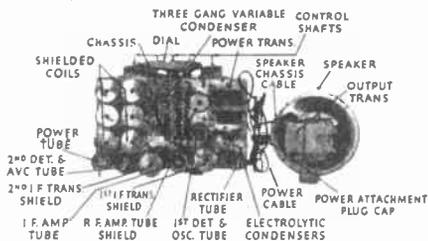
A. Most of this you can see without removing the chassis from the cabinet
